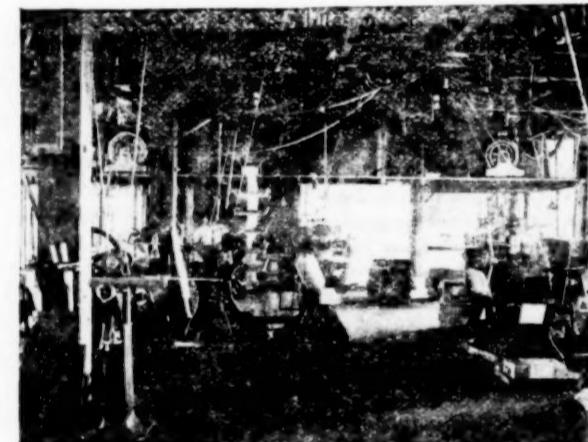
CORNER OF MACHINE ROOM SHOWING INDUCTION MOTORS.
